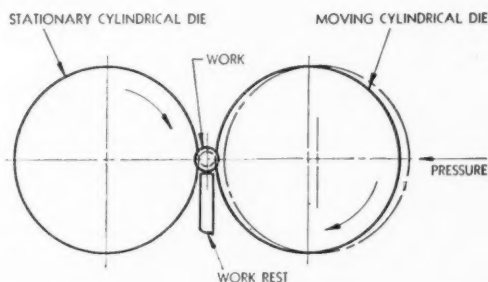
Cylindrical-die thread-rolling machine—2-die type
